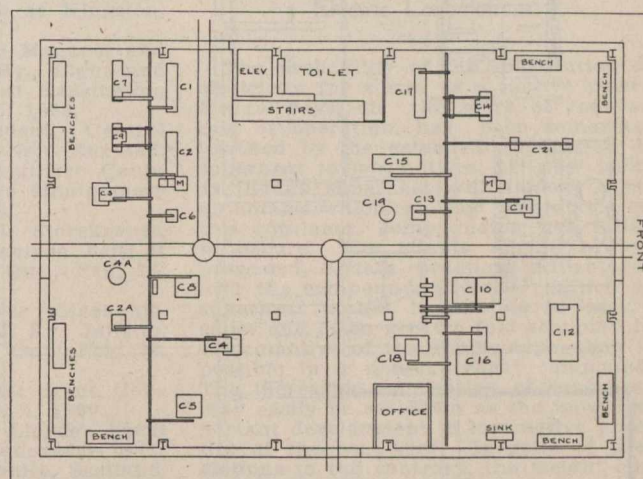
Plan and Tool Layout of Locomotive Carpenter and Pattern Shop.
